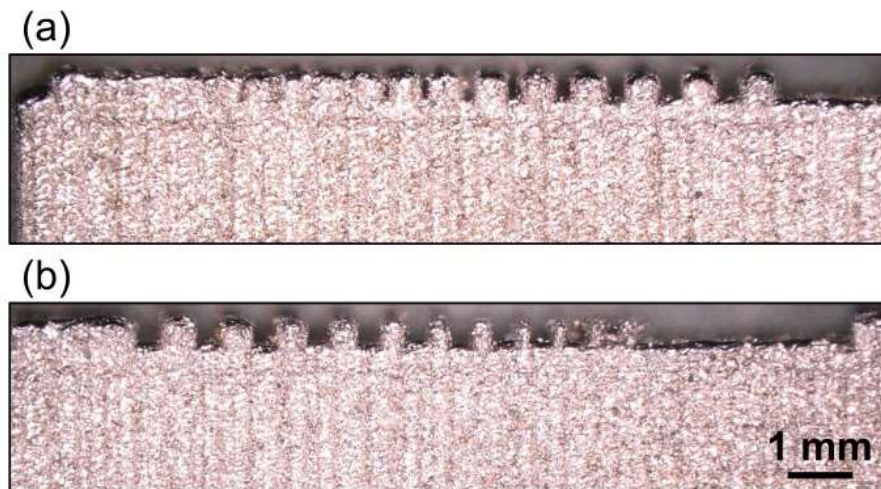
Minimum spacing for: (a) protruding, and (b) sunk features.
